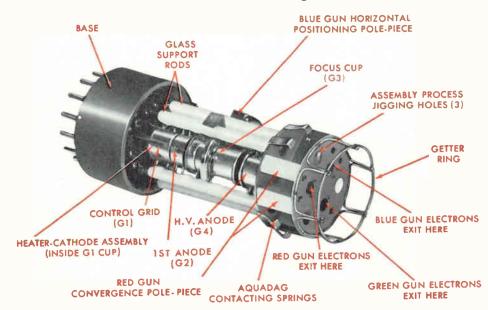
Electron gun assembly used in aperture mask picture tube.
